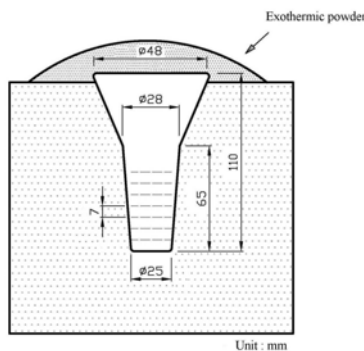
Schematic drawing of CO₂ bonded sand mold.
